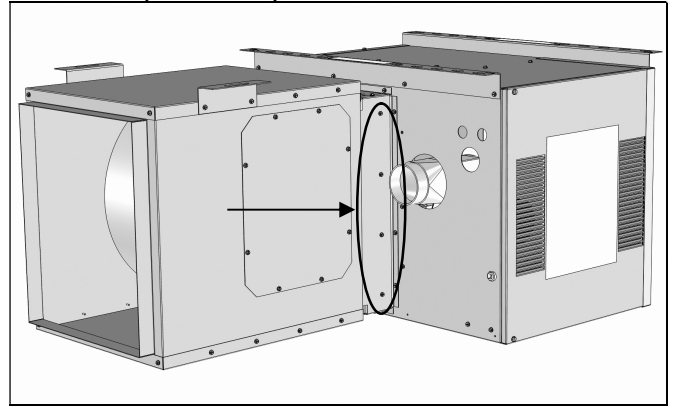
Blower Enclosure to Unit Attachment – Bottom View (BTP/BTS)
